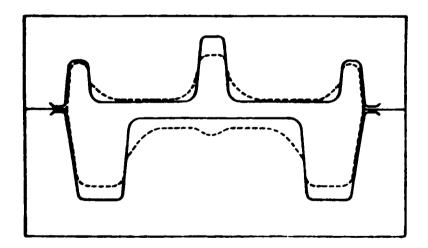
A typical forging cross section and a possible blocker design displayed on a computer terminal.
